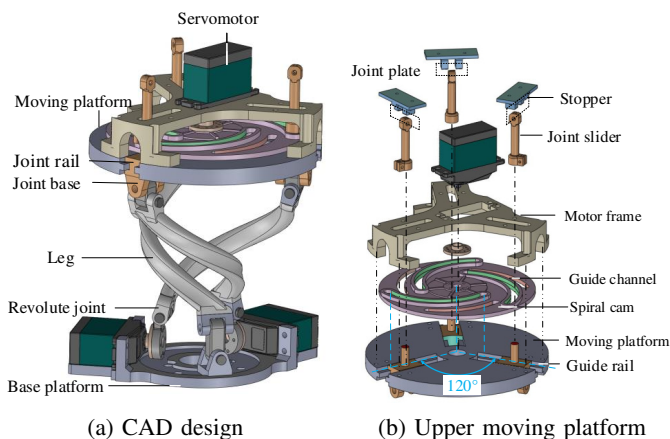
Schematics of the proposed device. (a) CAD design. (b) Assembly view of the upper moving platform of the device, which includes the spiral cam mechanism that actuates the three joint sliders driving the end-effectors.
